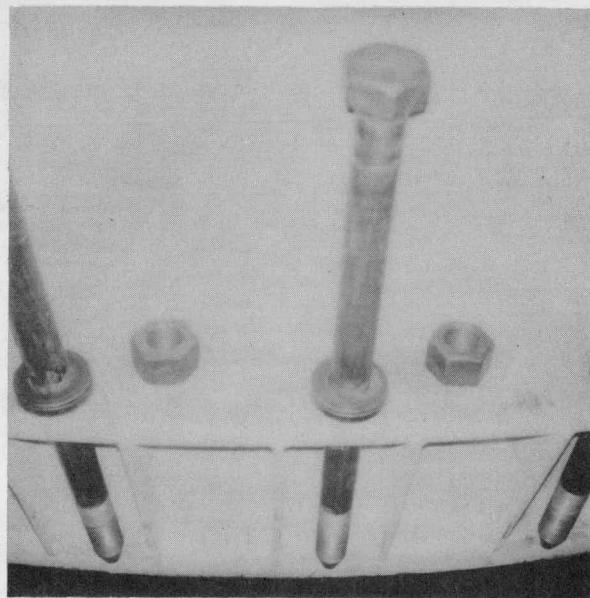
Lowering Drywell Head Bolt Removal Tools into Reactor Cavity (Browns Ferry)
